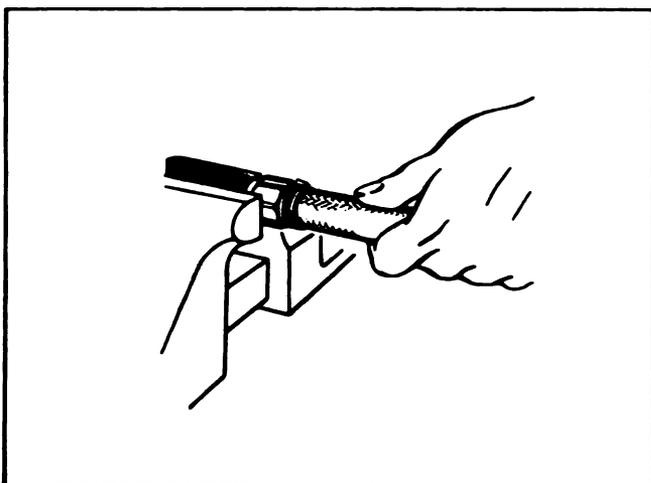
(N10737). Install The Hose Into The Socket.
